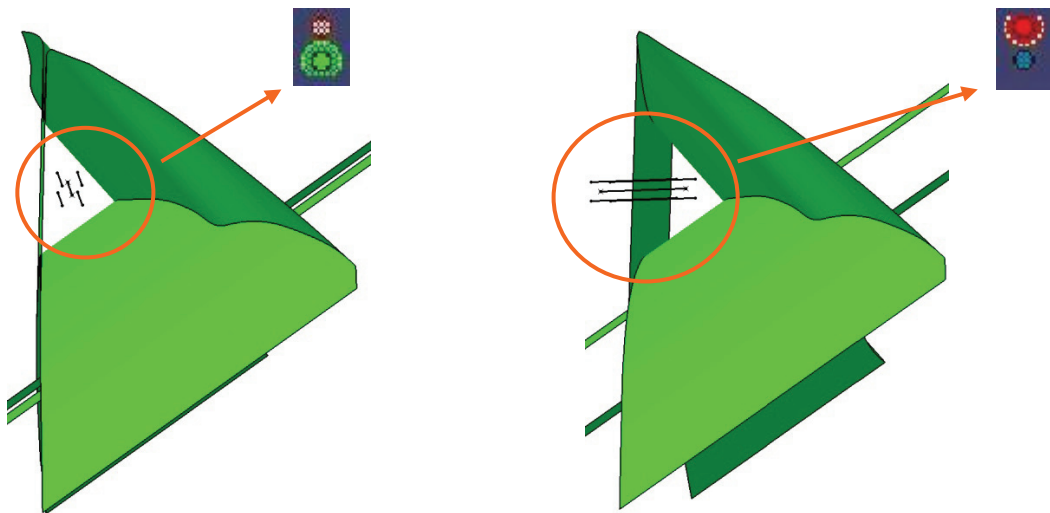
Check whether hinge axis including tolerance envelope intersects with positioning envelope
